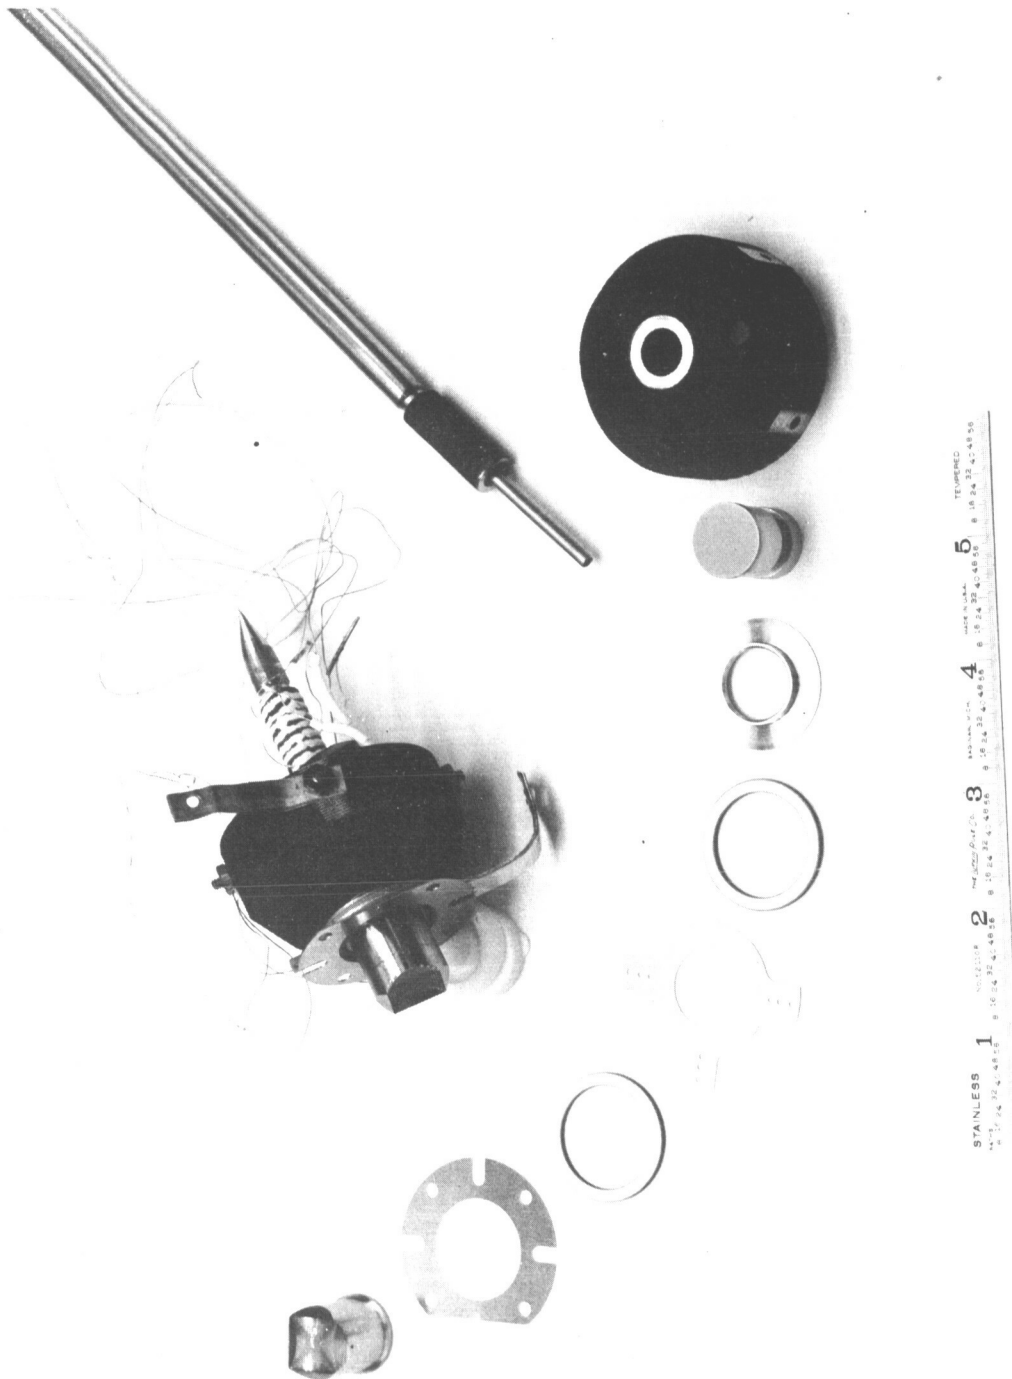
Exploded View of SET VII Parts and SET VII Diode
